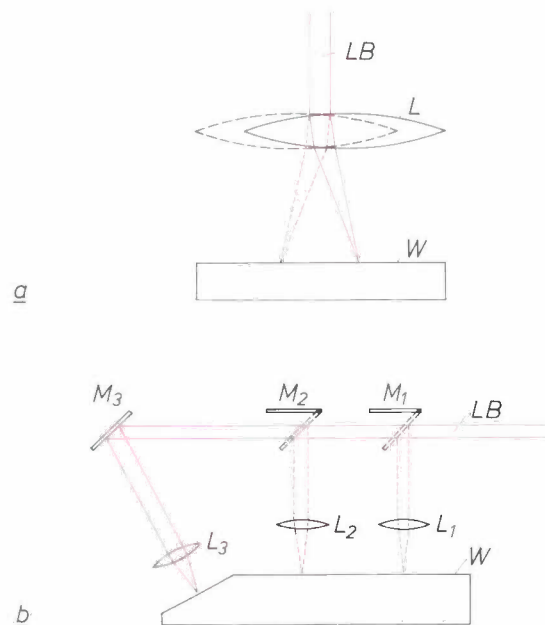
Focusing the laser beam on to the workpiece. *a*) The simplest case. *LB* laser beam. *L* lens. *W* workpiece. A small displacement of the focus can be obtained by displacing the lens (dashed line). *b*) Making more than one weld on the workpiece. *M*₁₋₃ mirrors, which may be pivoted. The other symbols are as in (*a*). This arrangement is not easily modified to suit another product, however.
